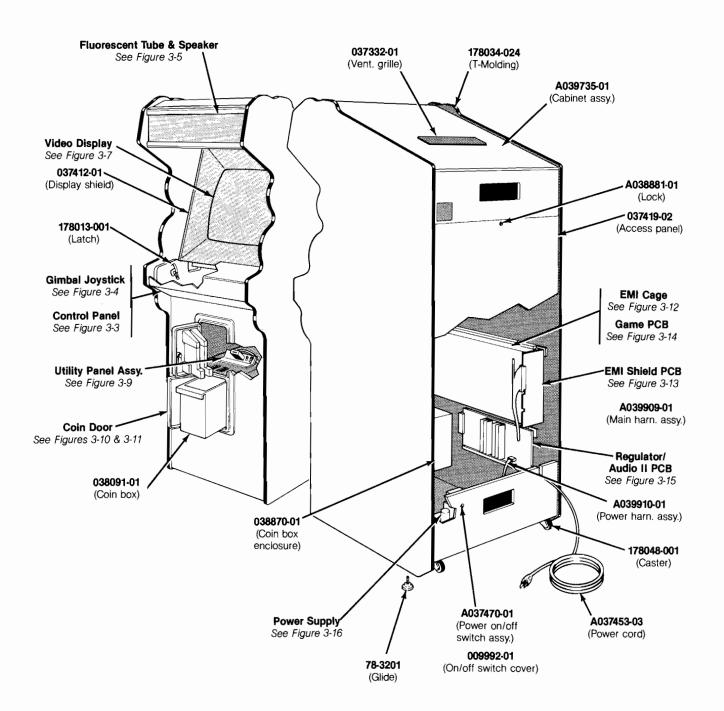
Cabinet-Mounted Assemblies US-Built Game A039734-01 A Ø
